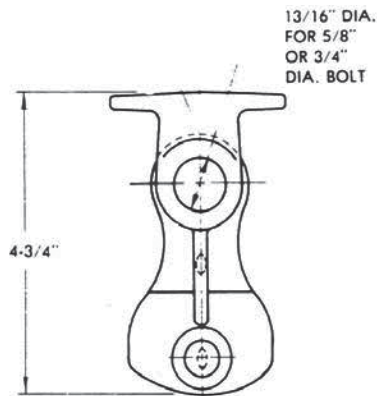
1/2" lag screw or 3/4" through bolt may be used in bottom hole if desired
